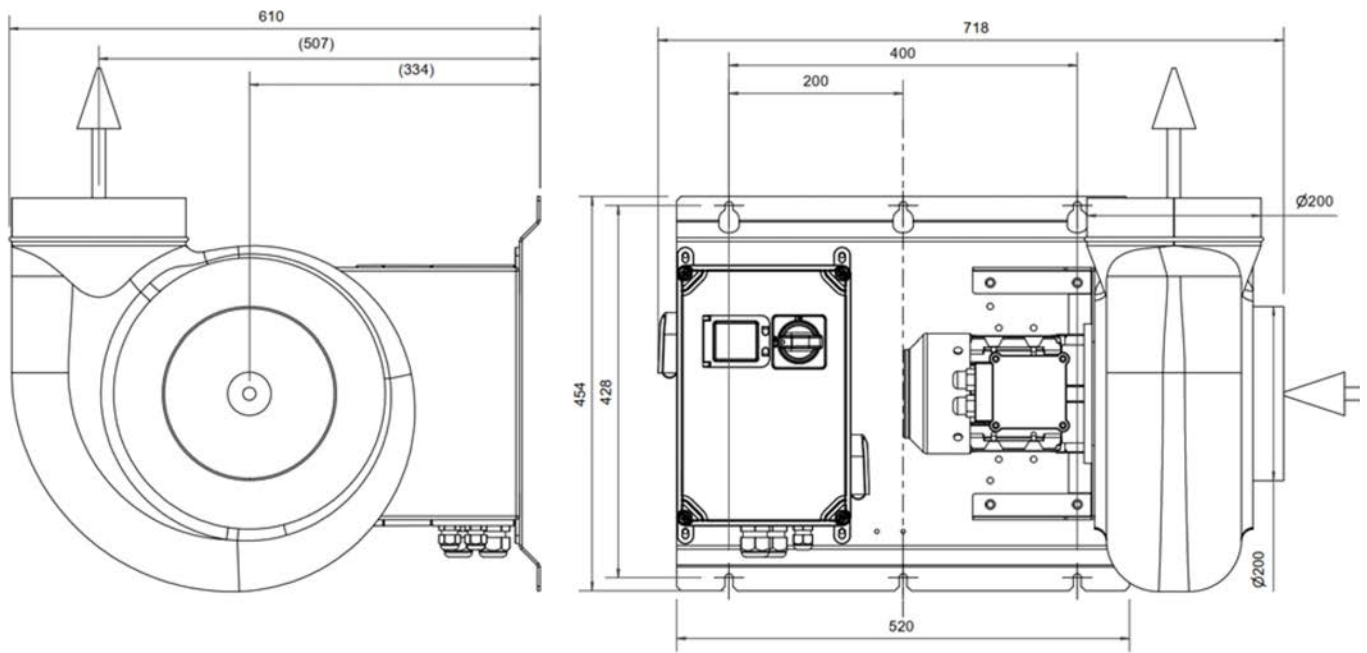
GebEF3 & GebEF4 installation dimensions
